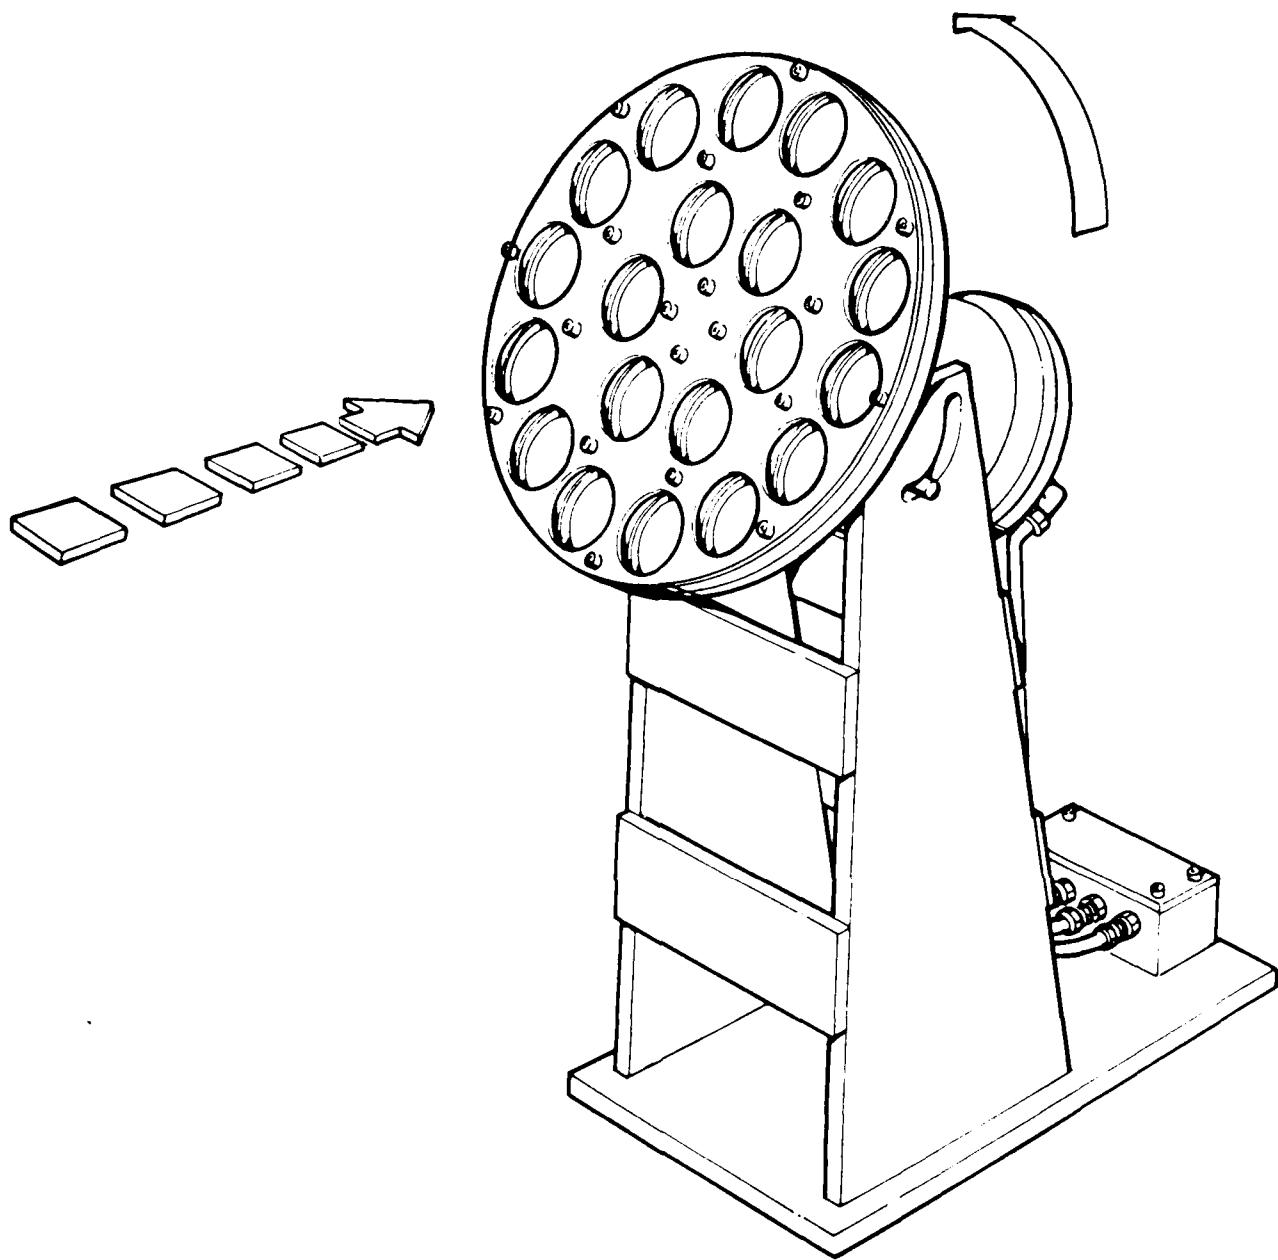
OUTSIDE RACE PLATTER MOUNTED ON VARIABLE ANGLE DRIVE.
